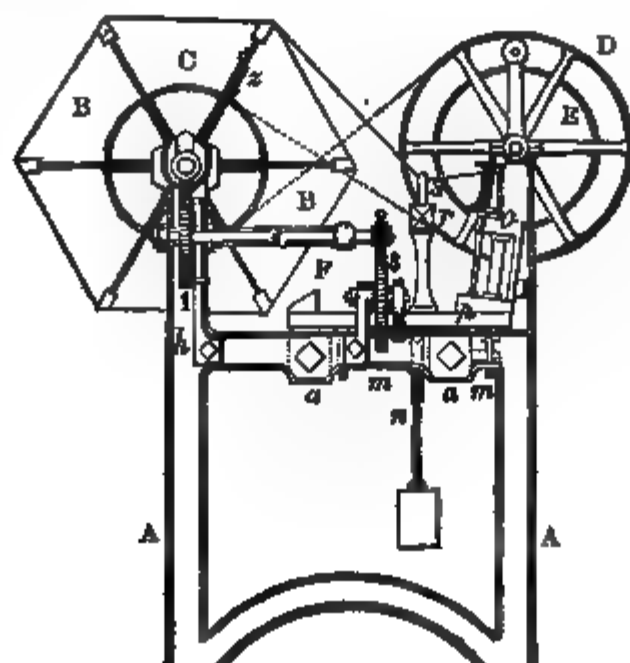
Automatic Reel, for winding and counting hanks. End view.
